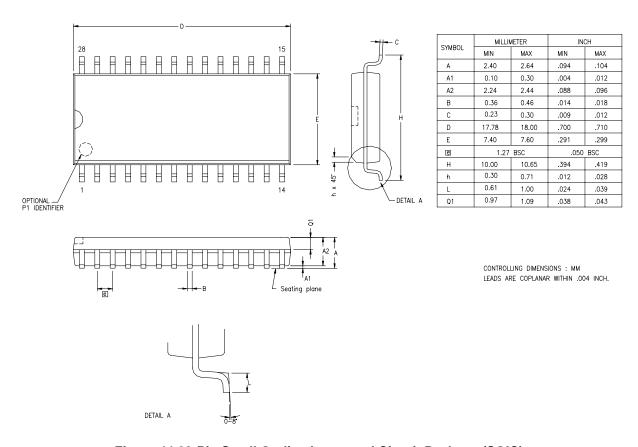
Pin Small Outline Integrated Circuit Package (SOIC)
